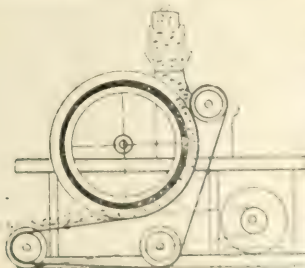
DETAIL OF SHAFT AND FLYWHEEL OF A GASWORKS CHARGER.
